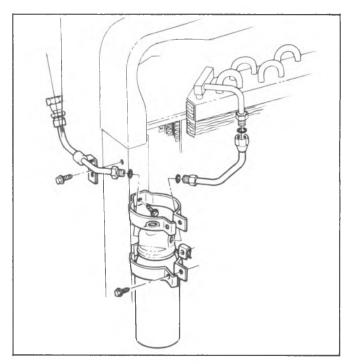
B-70--Receiver-Dehydrator (Motor Home Chassis Unit)
